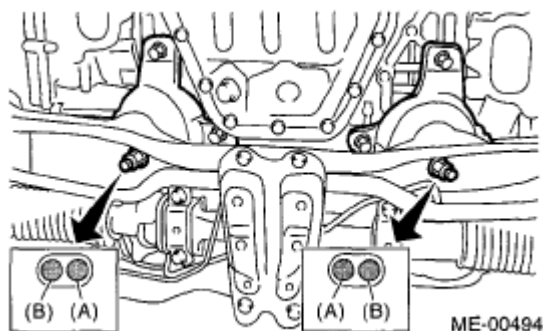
Identifying Front Cushion Rubber Mounting Bolts And Locator
